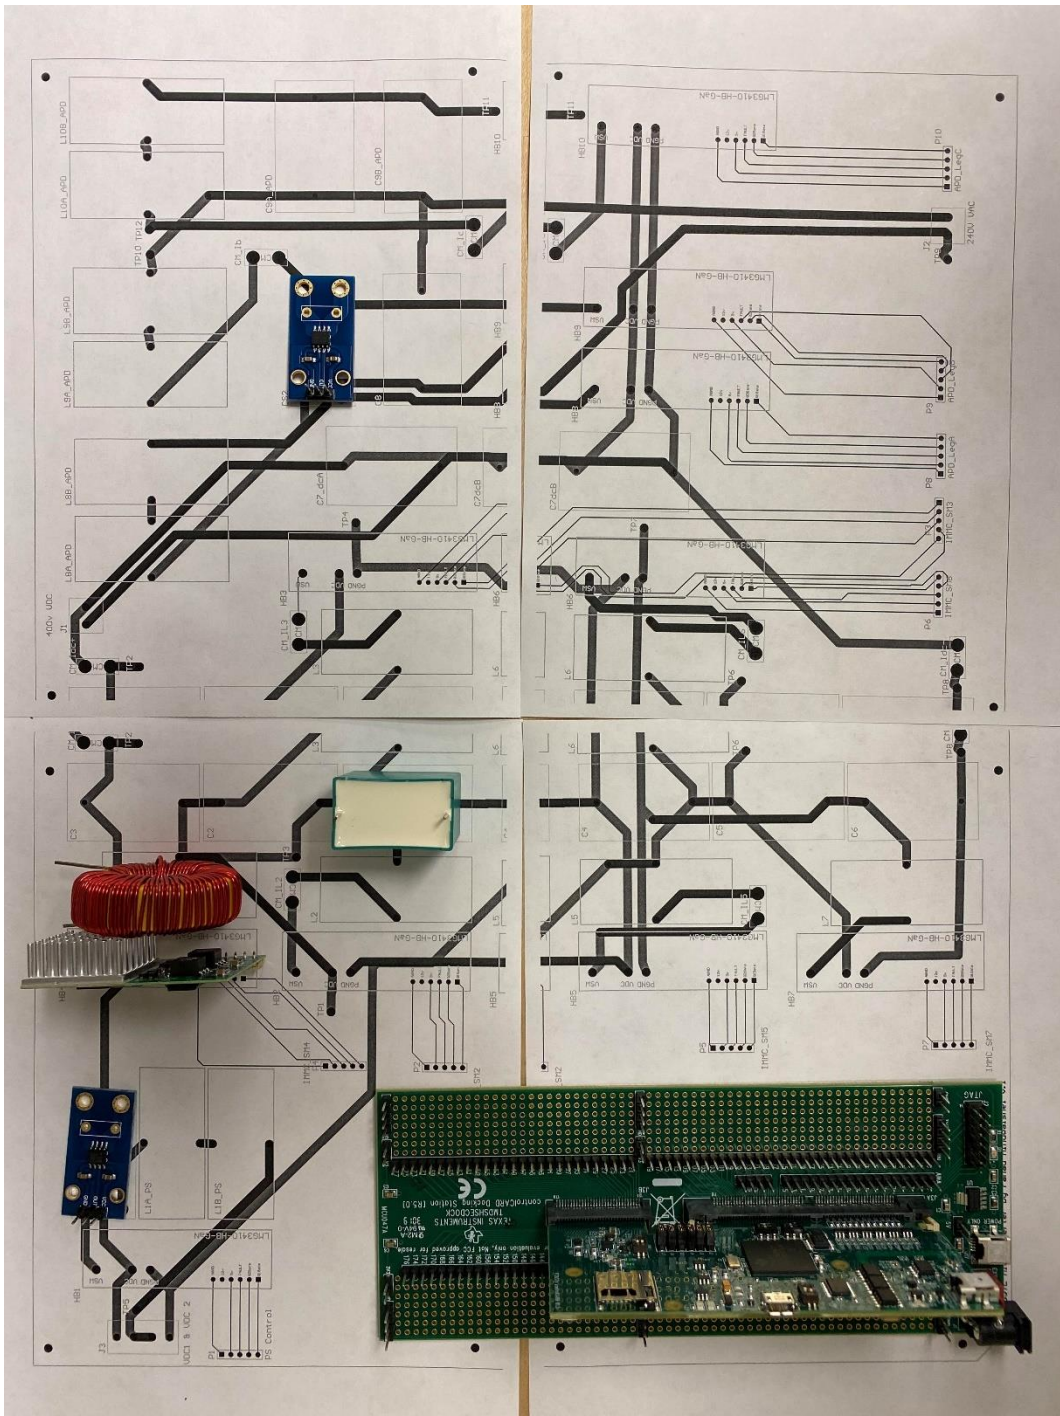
Shows an actual PCB size print out to confirm the layout for SSTL microinverter elements.
